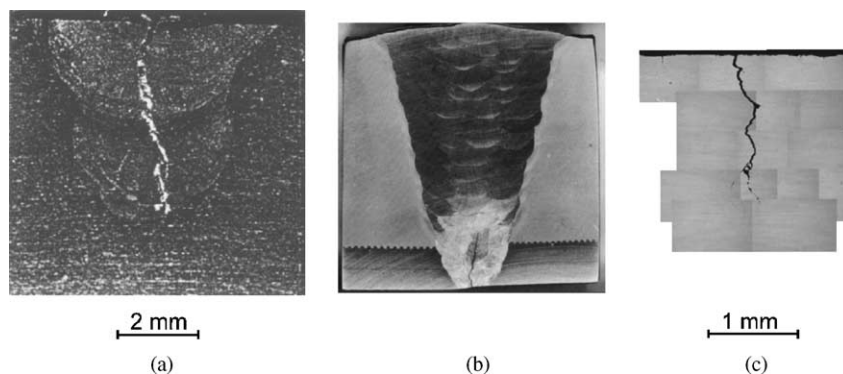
Comparison of defects produced with different techniques: (a) a weld solidification crack (Watson and Edwards, 1996), (b) a surface breaking crack in a weld (Uddcomb, 1999) and (c) an artificially produced surface breaking thermal fatigue crack.
